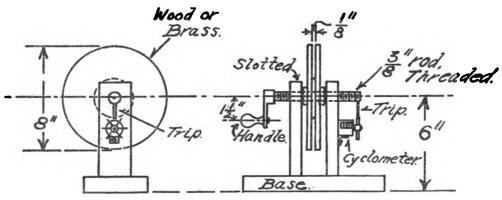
WORKING DRAWING FOR CONSTRUCTING A WINDING MACHINE FOR MAKING SECONDARY SECTIONS
